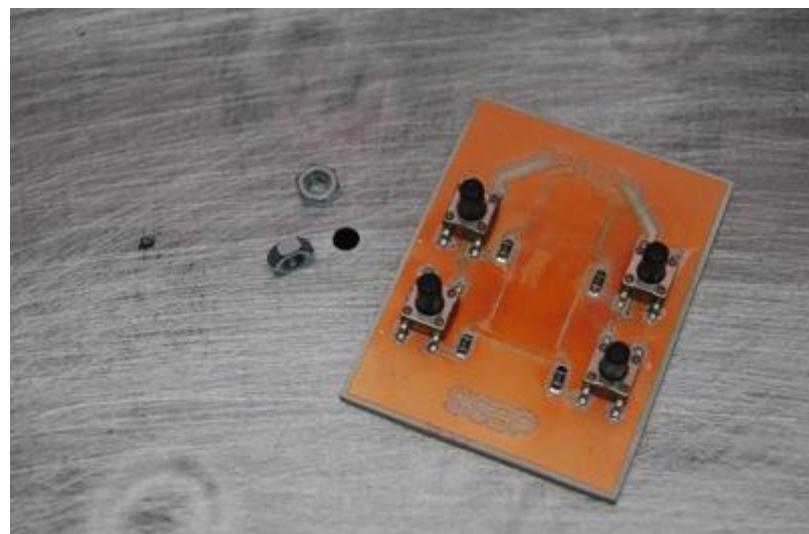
Keypad PCB with Surface Mount Components Soldered.
